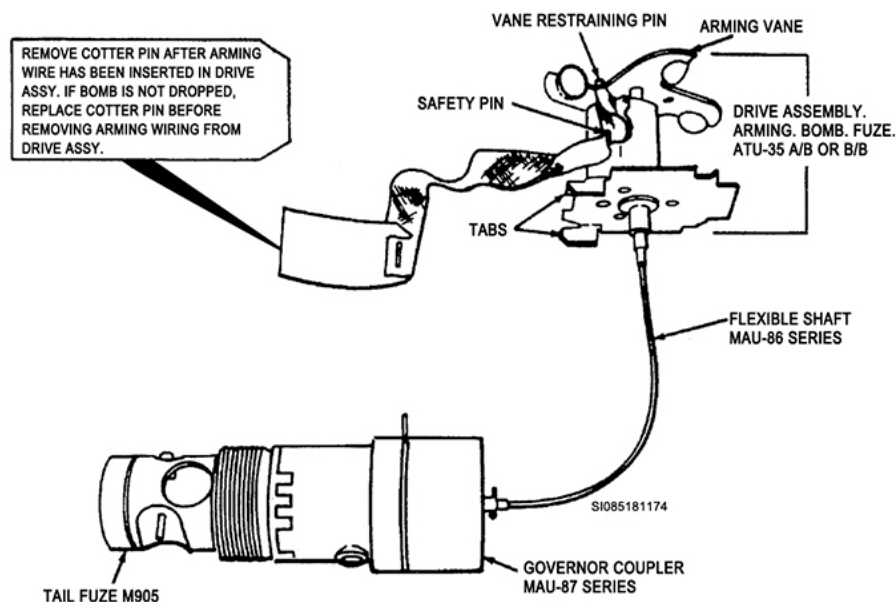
ATU-35 drive assembly coupled to M905 tail fuze.
